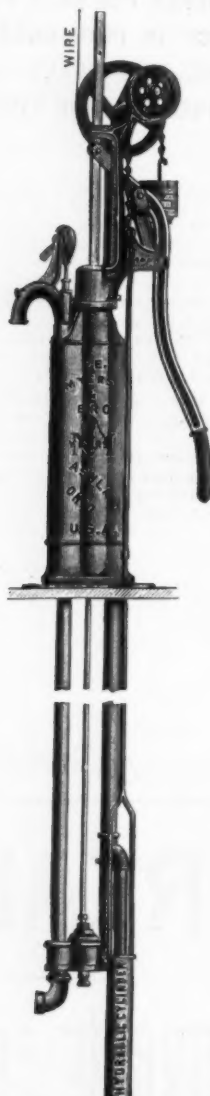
IMPERIAL WIND-MILL REGULATOR FORCE PUMP.
